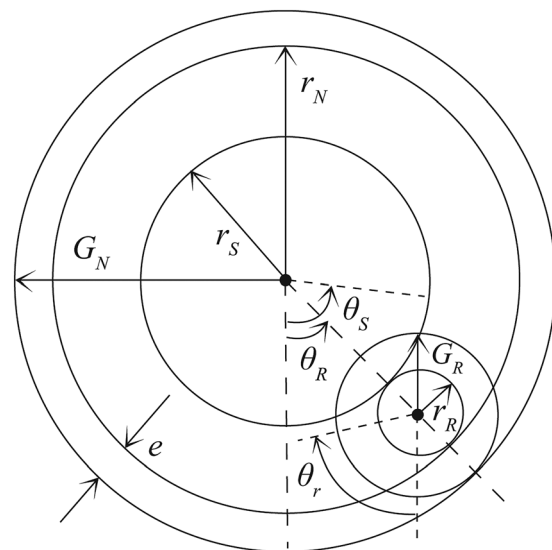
Planetary gear dimensions, pitch circle mismatch exaggerated
